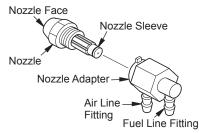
Nozzle and Nozzle Adapter (100/150 Models)
